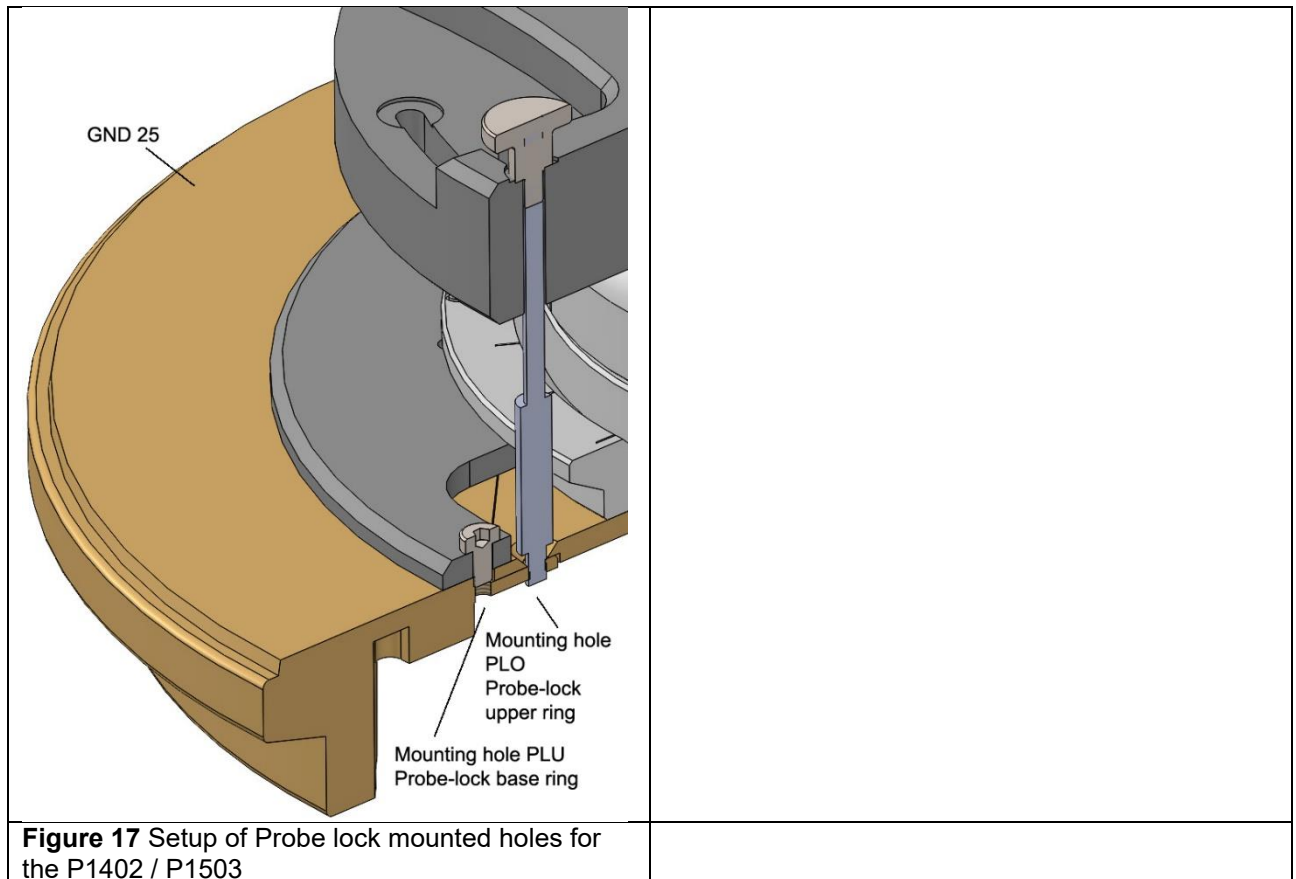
Setup of Probe lock mounted holes for the P1402 / P1503
